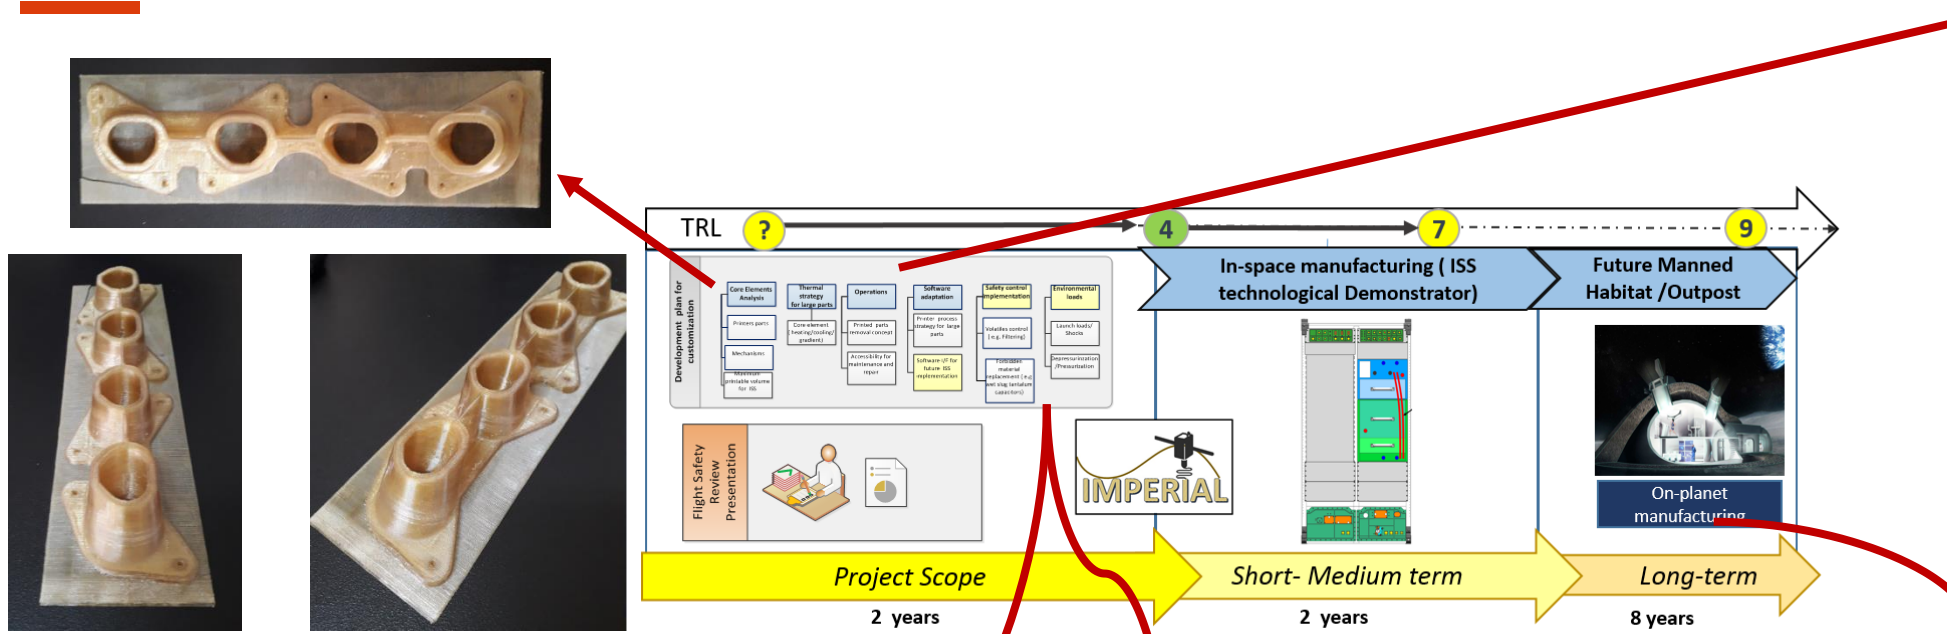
D-printed manifold with IMPERIAL printer (PEKK)
